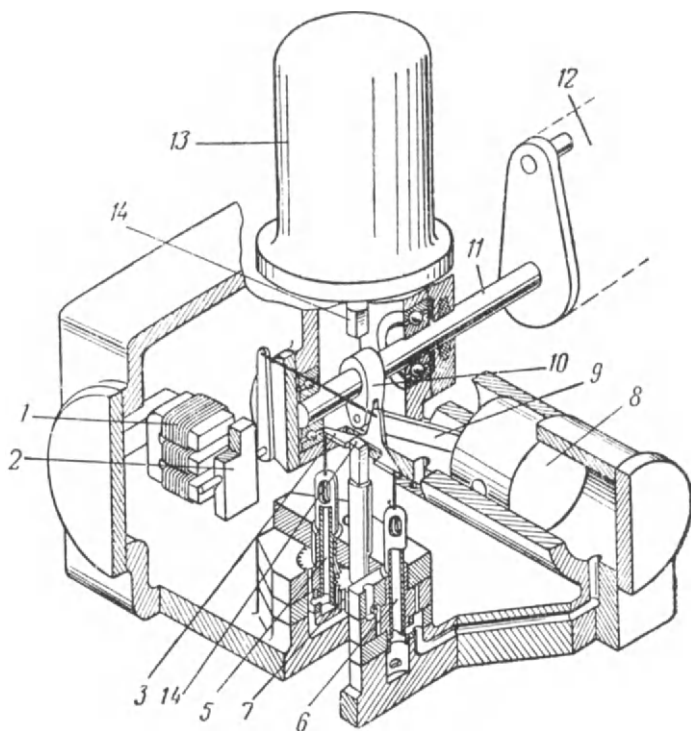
Construction of a steering mechanism: 1, polarized relay; 2, yoke; 3, slide valve; 4, spring; 5, 6, slide valve pistons; 7, gear pump; 8, power piston; 9, rocker arm; 10, crank; 11, vane shaft; 12, vane; 13, gear pump motor; and 14, motor shaft.
